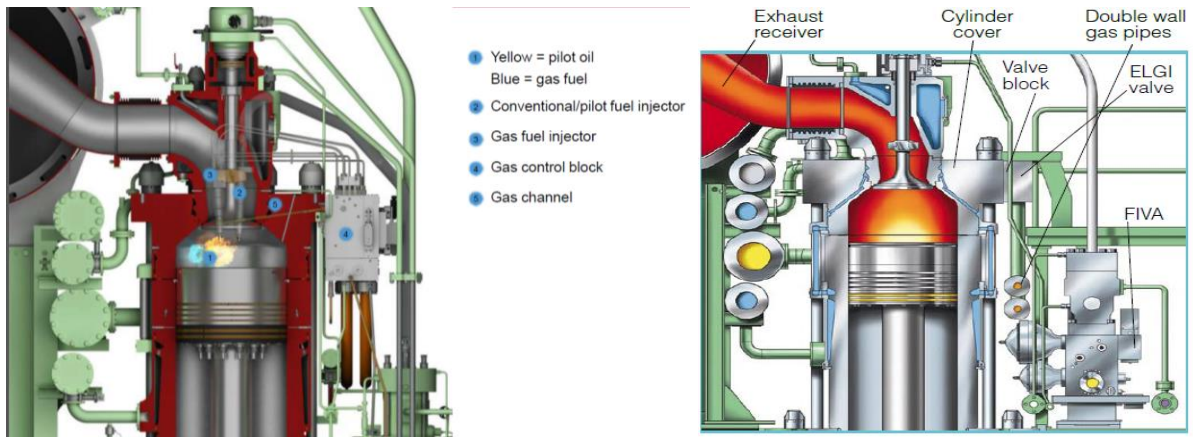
Sketch of large 2-stroke dual fuel engine made by MAN Diesel & Turbo [5]
